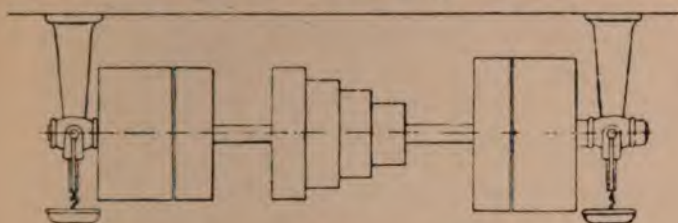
Countershaft for Screw-Cutting Lathe.
